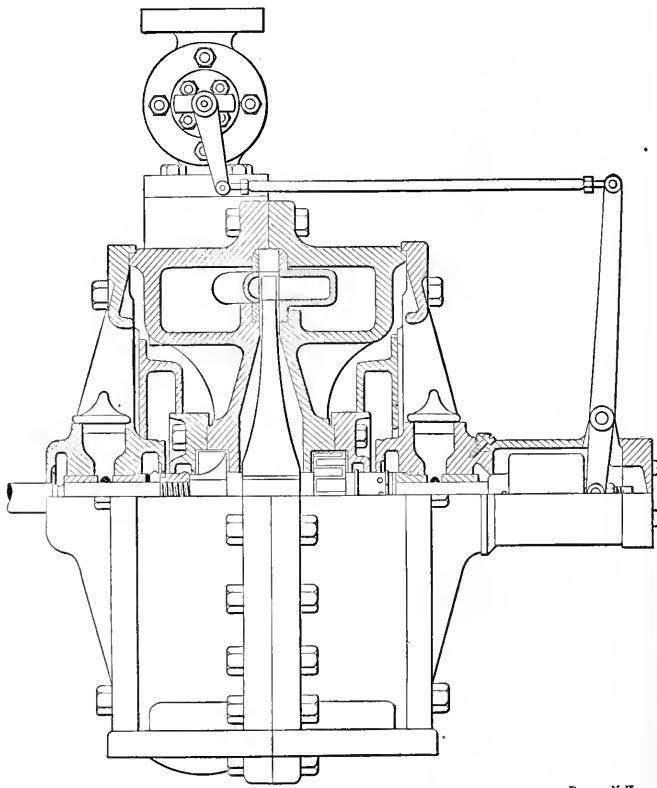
SECTION OF WILKINSON STEAM TURBINE, 20-INCH
